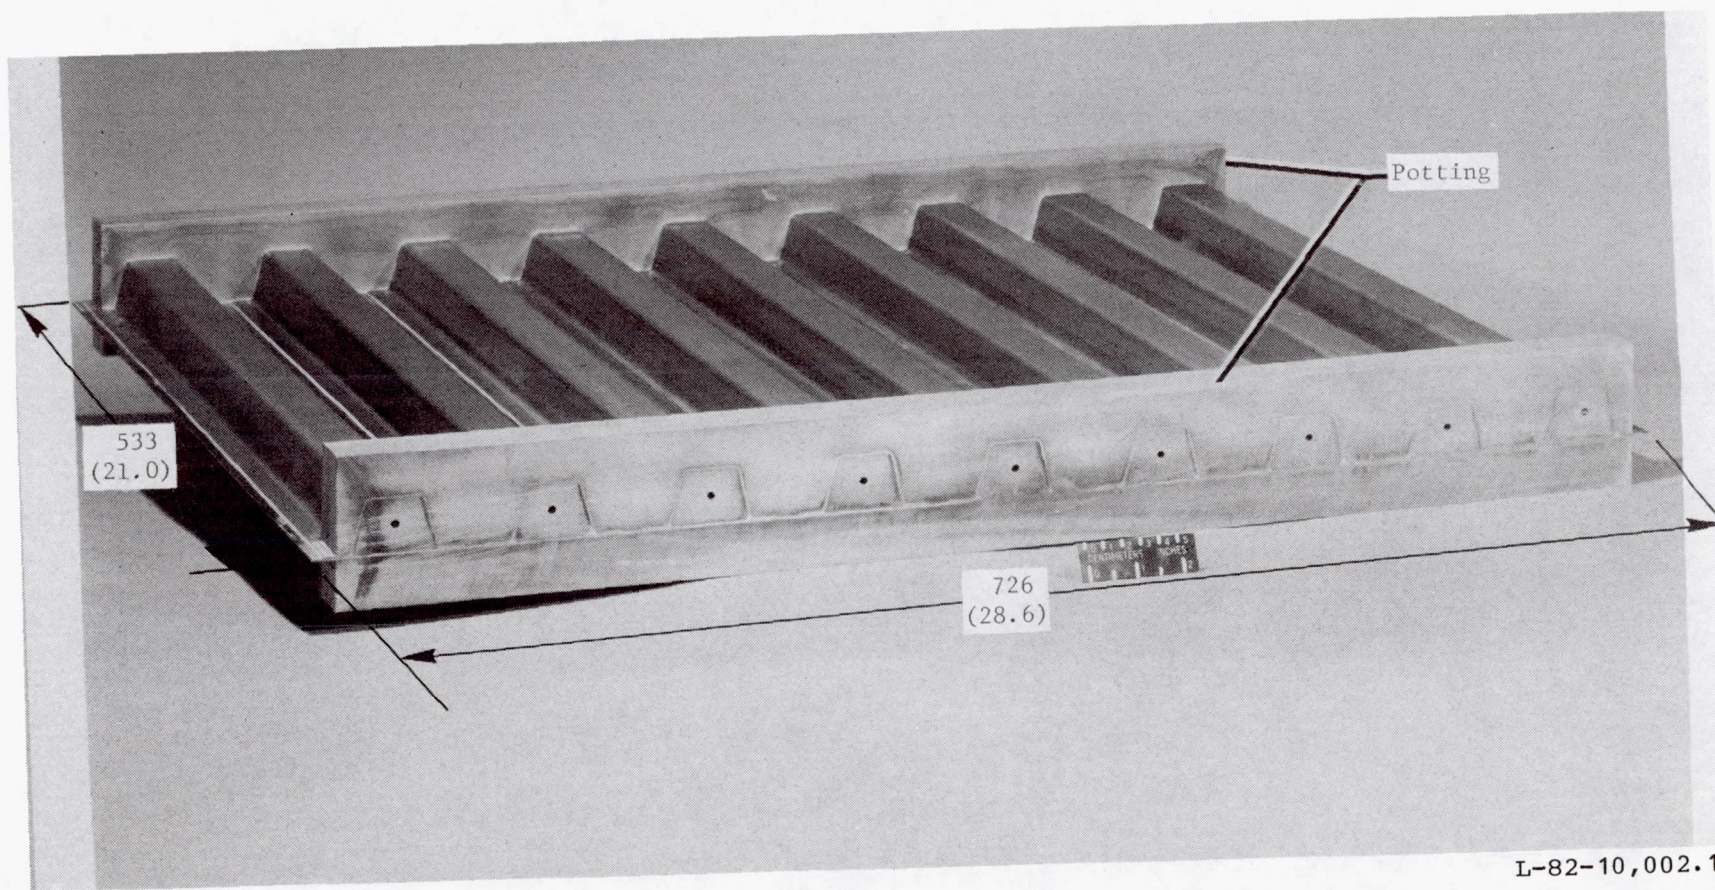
Multi-stiffener test panel trimmed and potted for test. Dimensions are in millimeters (inches).
